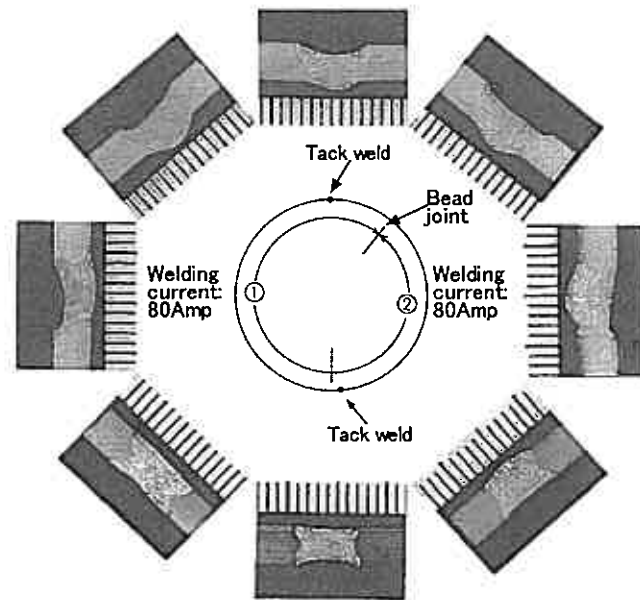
Macrostructure of TGX-308L welds made on a 304-type stainless steel tube (4T X 50mmφ) in horizontally fixed position (5G position per ASME). The terminal of the 2nd pass was joined with the terminal of the 1st pass at the point between the 1 o'clock position and the 2 o'clock position.
